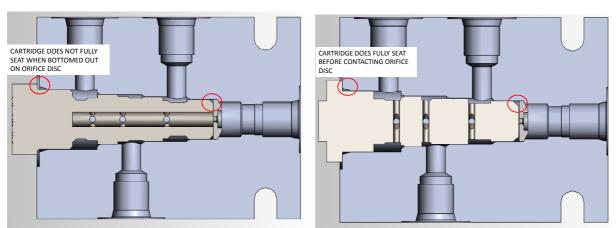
Hydraforce Locking Valve (Left) & Parker Locking Valve (Right)
